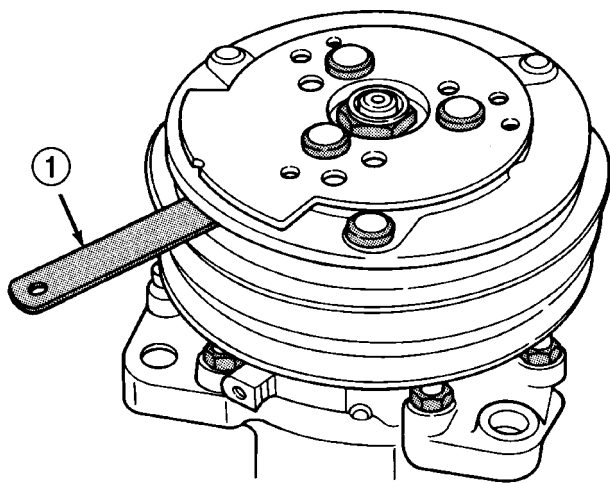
CLUTCH PULLEY INSTALL - Typical
